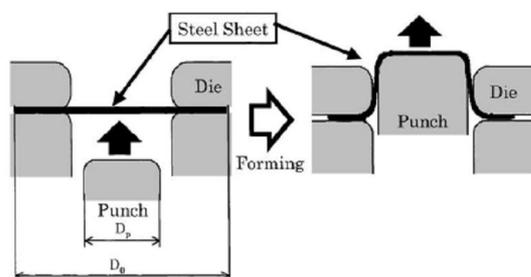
Procedure of deep drawing test, D_0 diameter of blanked steel sheet; D_p diameter of punch
